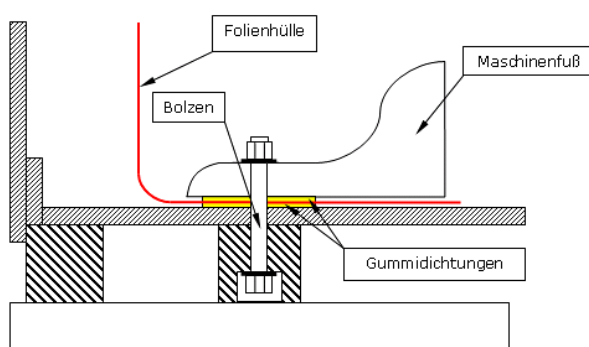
Bolting between packaged goods and box floor with inserted seal, an insulation between goods and floor / wall
